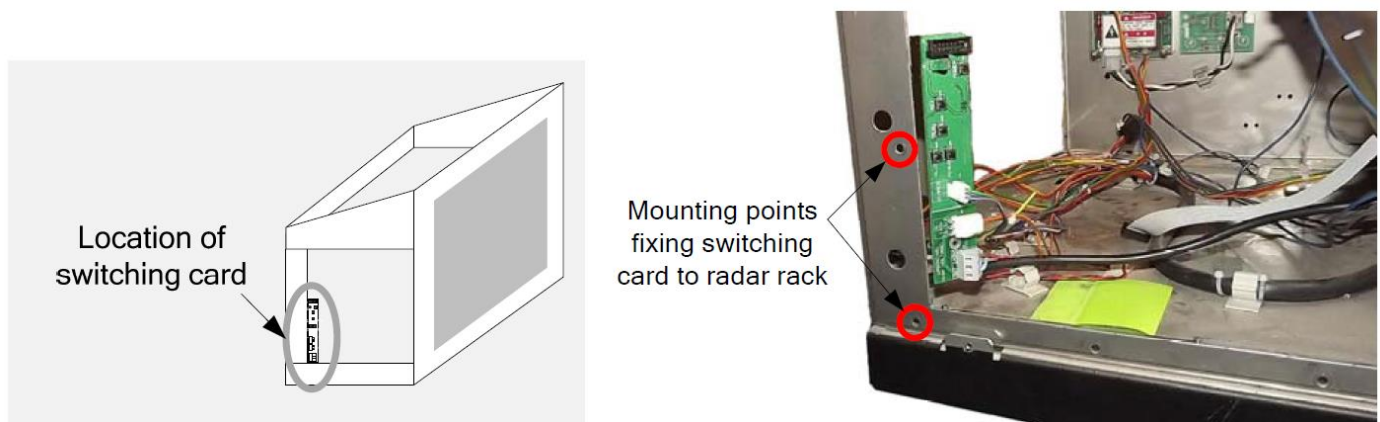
The location of switching card (on the left), general view of switching card in radar rack (on the right)
